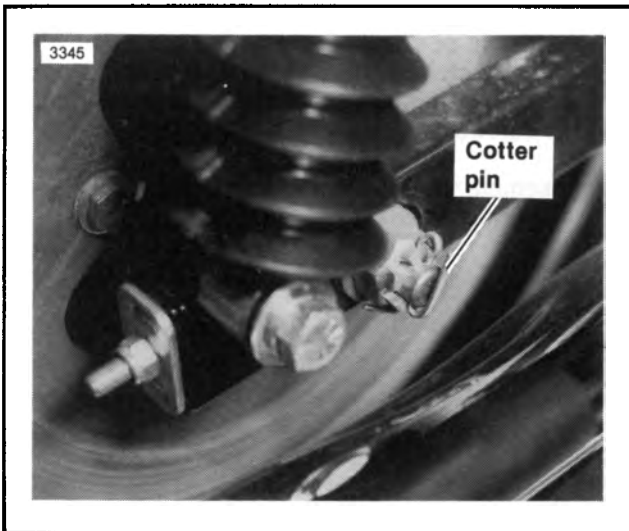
A. Rear Axle with Cotter Pin — 1989 & Later
